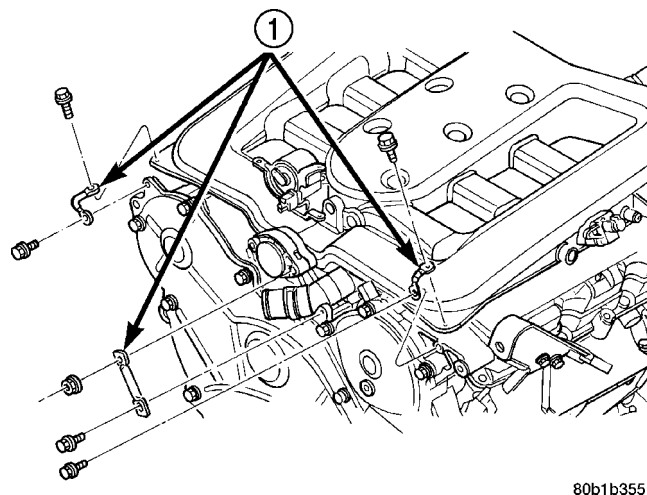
INTAKE MANIFOLD SUPPORT - RIGHT
